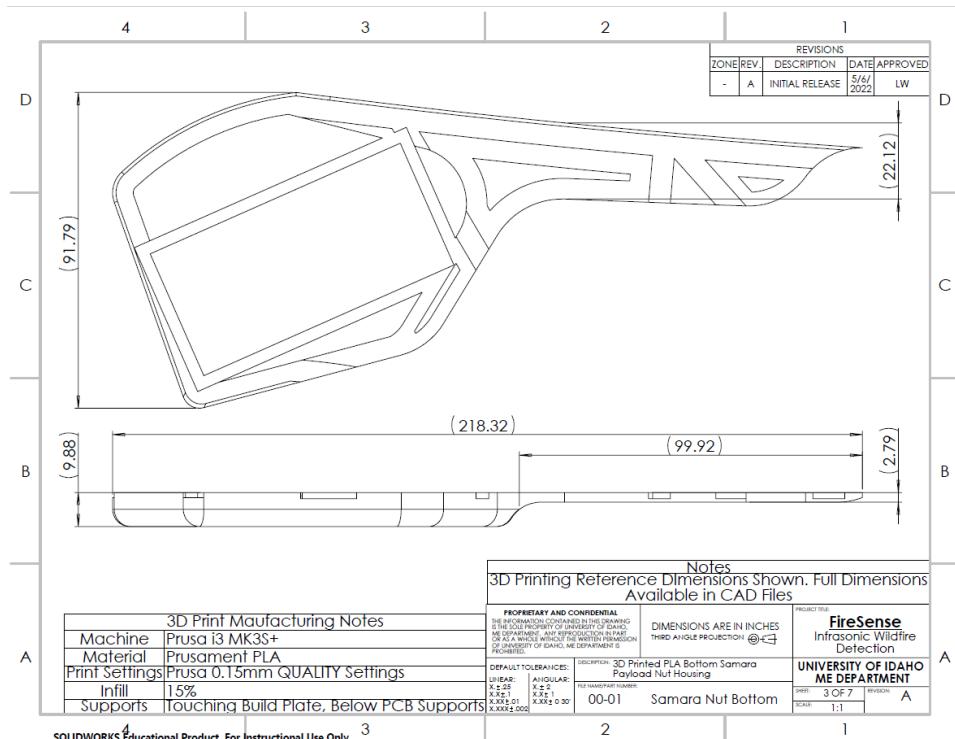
Technical Drawing Package Sheet 3, Samara Nut Bottom
